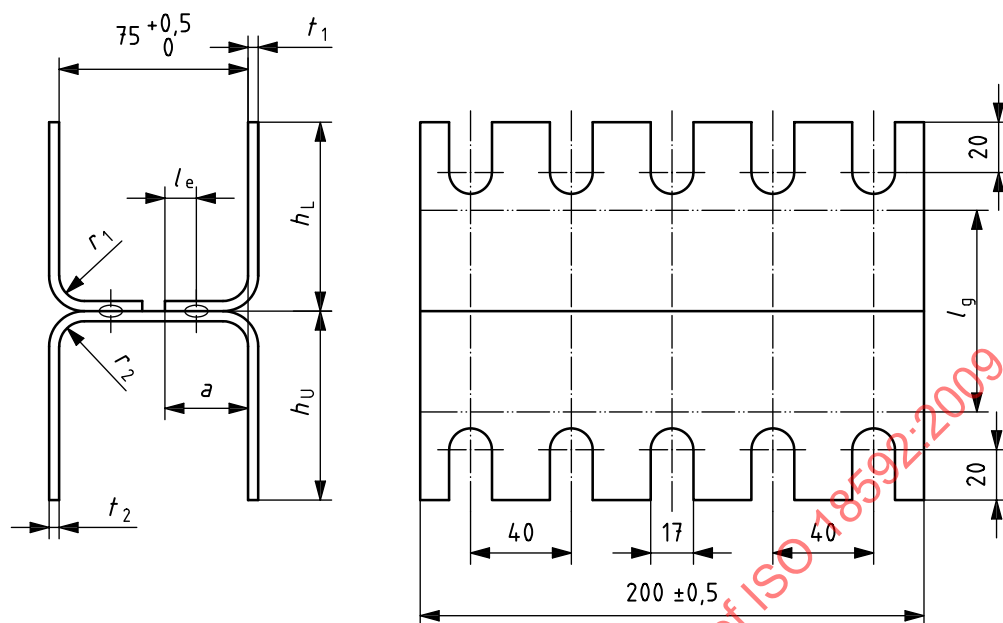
H-Shear specimenTable 5 — Dimensions of shear multi-spot H-specimens
